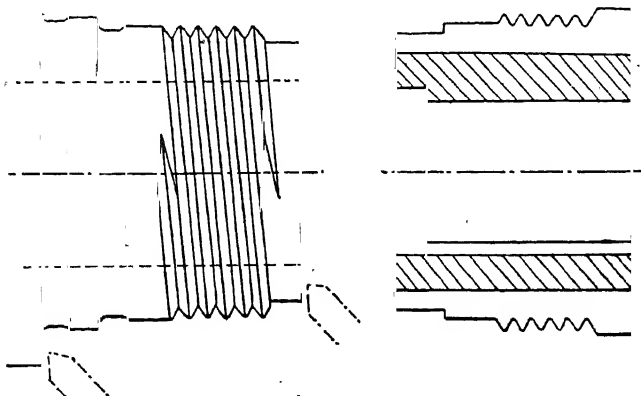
The bands are milled with the same cutter, and facing tools operate on the same machine.
